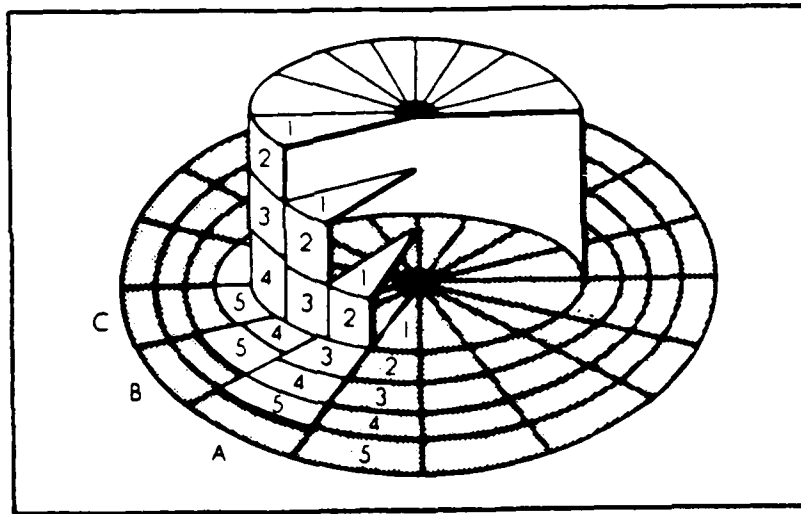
Progressive states in drawing a blank (from: [Wick], Fig. 4-41)
